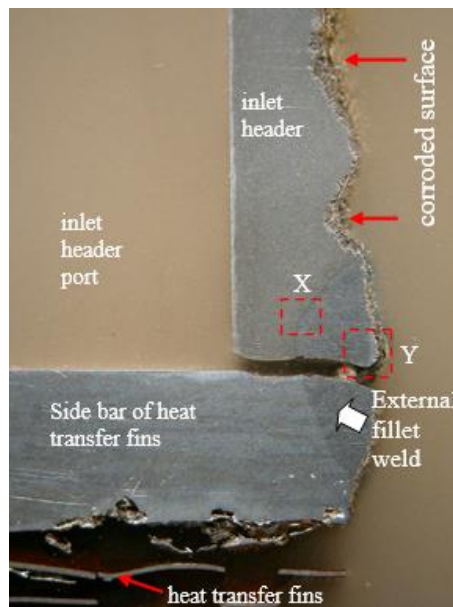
Cross section of a polished and etched specimen obtained from the leaked weld joint between header and sidebar/parting sheet
